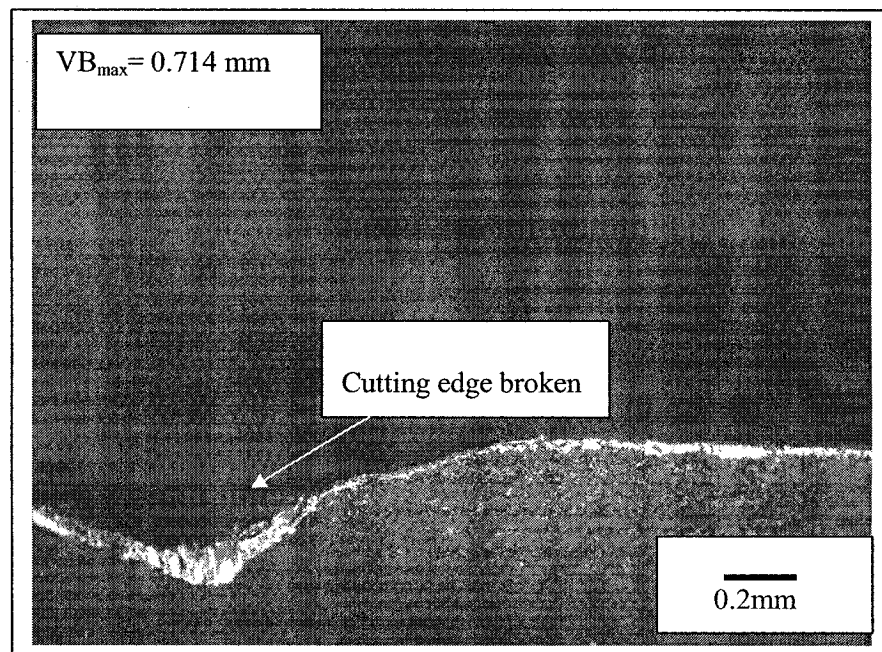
SMM micrograph of wear surface (APKTIC928, coated carbide insert, cutting speed= 110 m/min, feed= 0.025mm/tooth, dry cutting)
